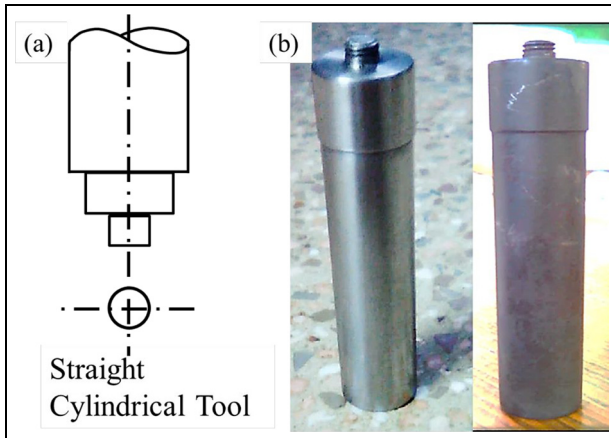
(a) Schematic of FSW tool adapted after⁴² and (b) machined and hardened tool.
